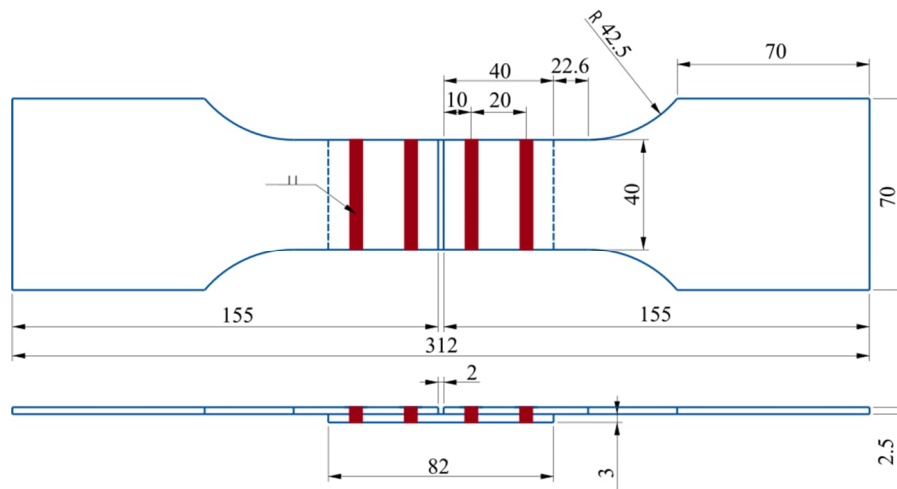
Test coupon geometry and dimensions in mm.
